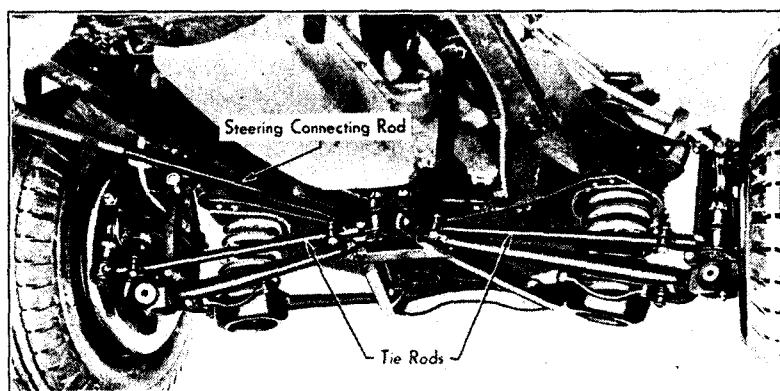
Two tie rods are used to connect the intermediate steering arm to the steering knuckle arms
